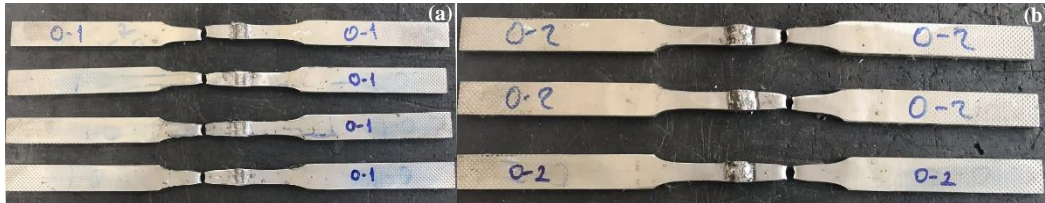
Macrographs showing the fracture locations in the tensile test specimens extracted from: (a) lower and (b) higher heat input joints.
